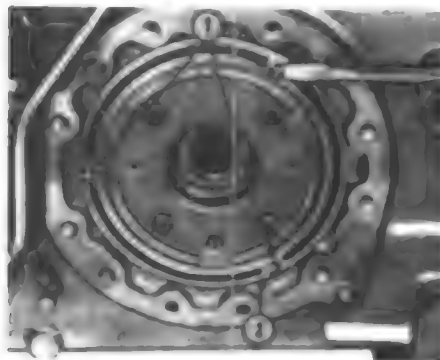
Install screws (1) and pry brake piston (2) from housing.
